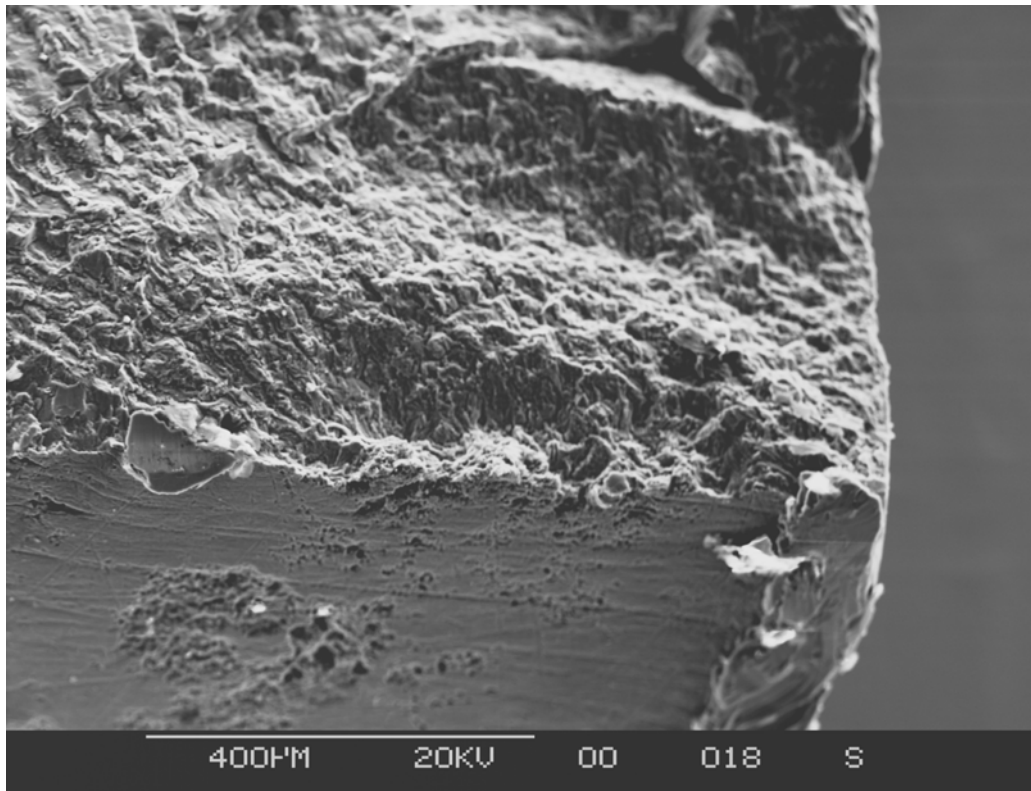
Close-up Surface View of Origin at Pit on Specimen 5616.
